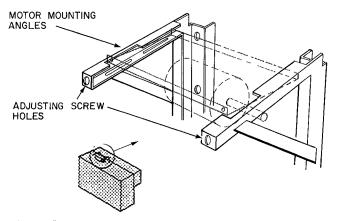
50BJ,BK028 and 034 Horizontal Fan Motor Mounting Angles
